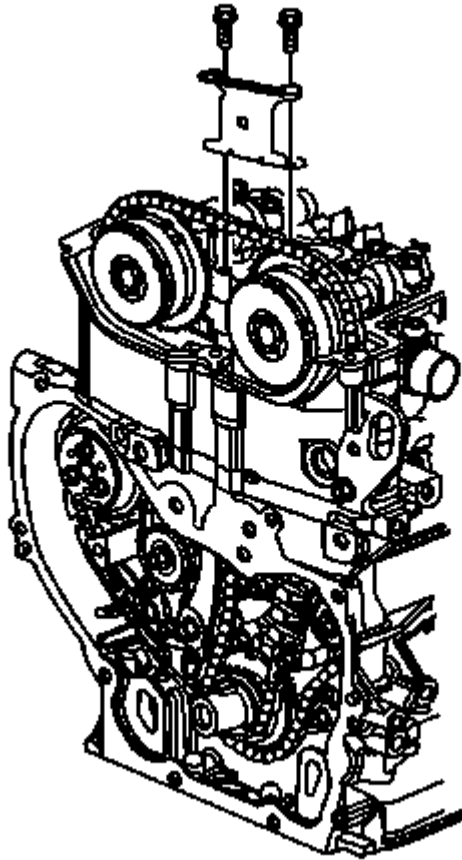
View Of Upper Timing Chain Guide & Bolts
